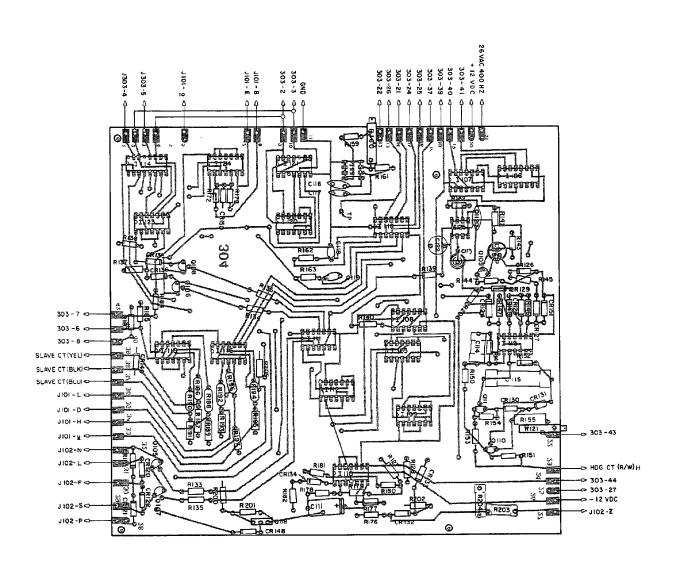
A P.C. BOARD ASSEMBLY, BOARD 304, DRAWING (Dwg. 300-05988-0000 Rev. 0)
